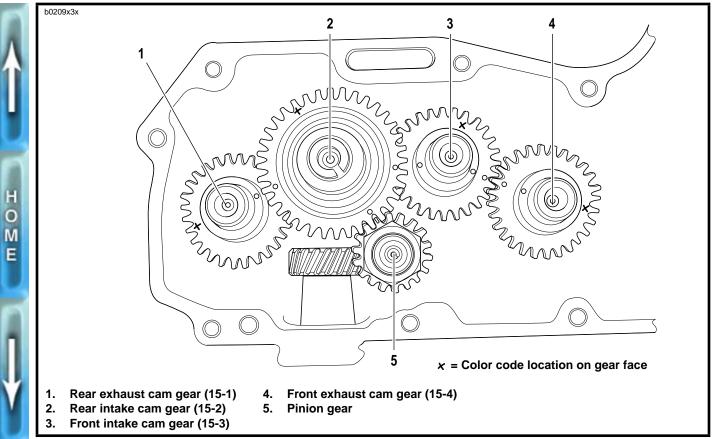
Cam and Pinion Gear Color Code Location and Timing Mark Indexing
